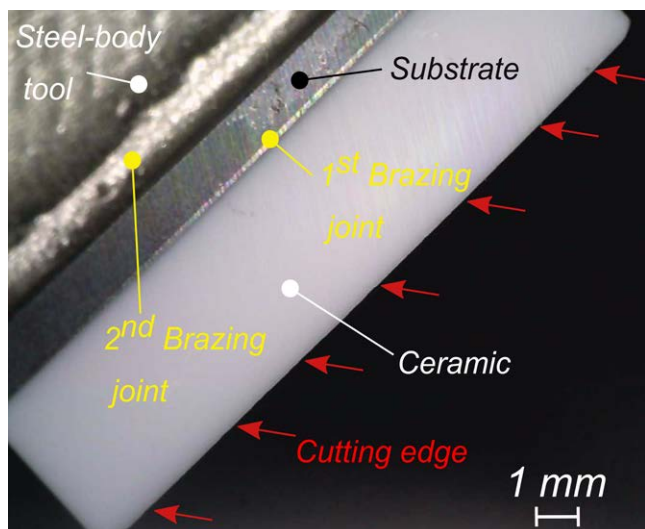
System of double brazing joint assembly of the ceramic cutting material.
